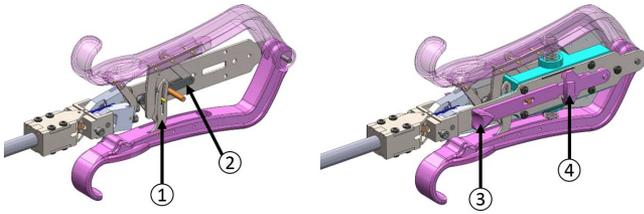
Dexterous tool handle, showing ① grasp locking mechanism, ② Z-bar mechanism, ③ lock release button, and ④ lock disable switch.
